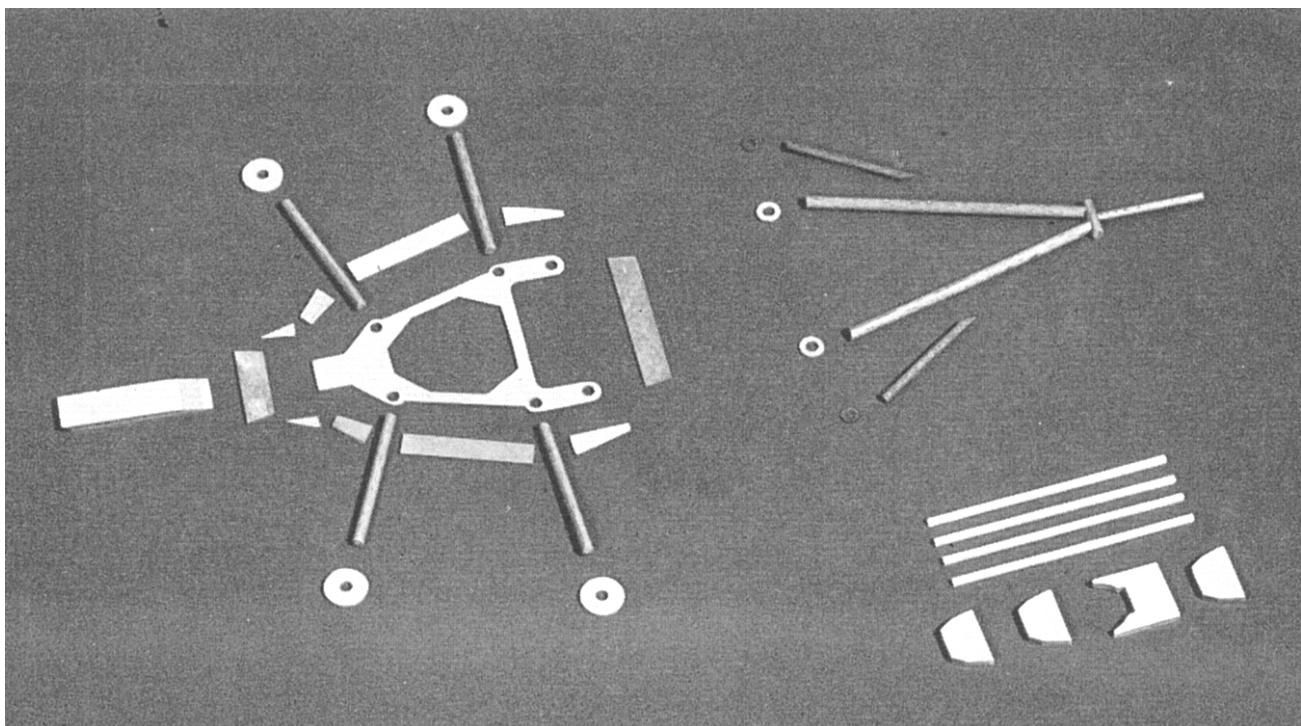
the components of the radome platform before assembly. The picture also shows the mast and torpedo supports.
